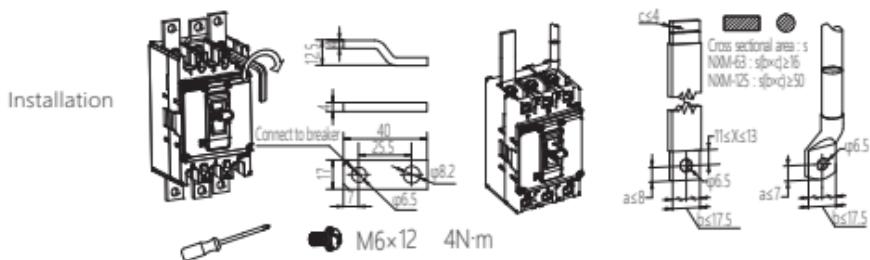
NXM-63/NXM-125 connecting plate and wiring dimension
